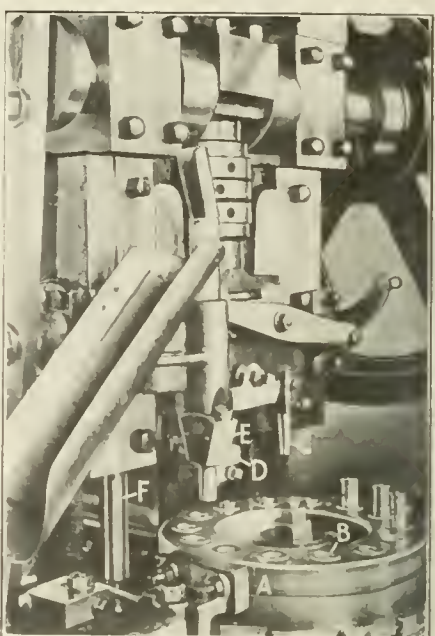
Heading Machine in which the Braee Wad and Brass Cap are formed to the Correct Shape
